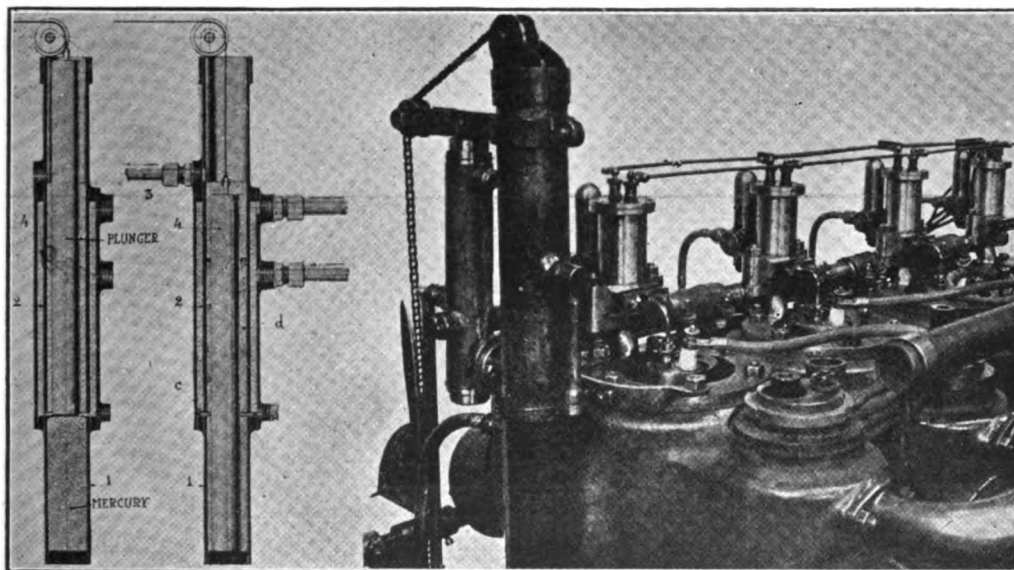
Left, details of fuel-pressure device in Bellem motor. Right, top appearance of motor when fitted with the fuel pulverizing apparatus employed by Bellem
